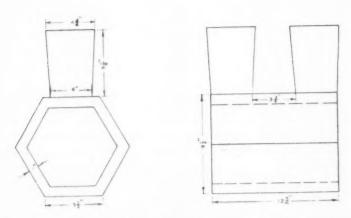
SKETCH OF REGULAR HEXAGON CASTING UNIFORMLY ONE INCH THICK SHOWING RISERS.
